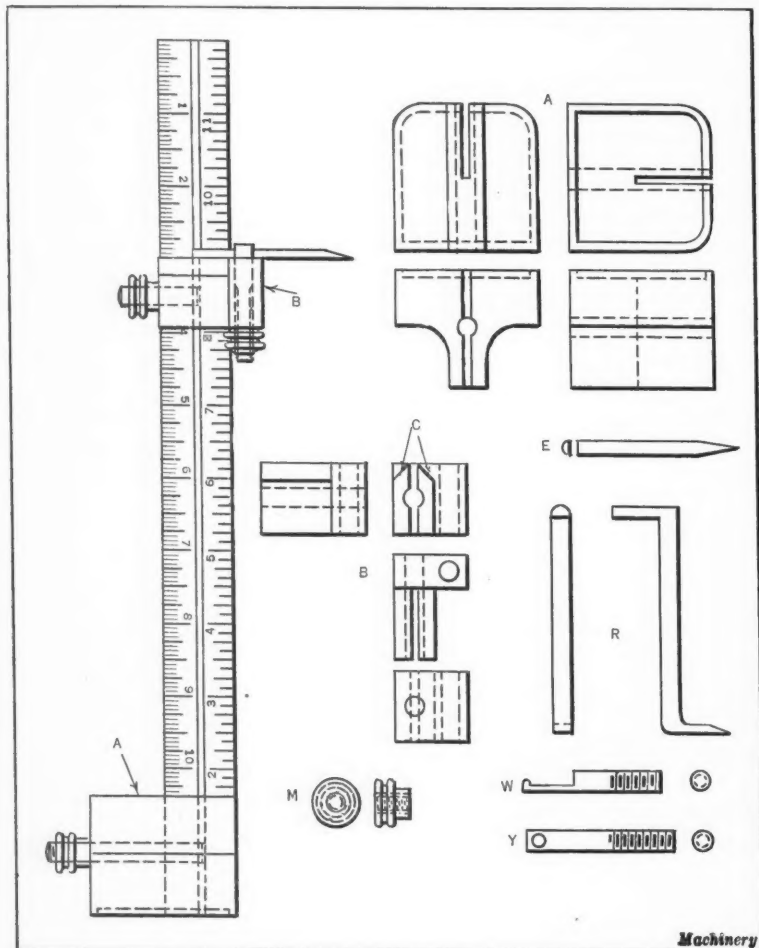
Details of Height Gage Attachment for Machinist's Scale
